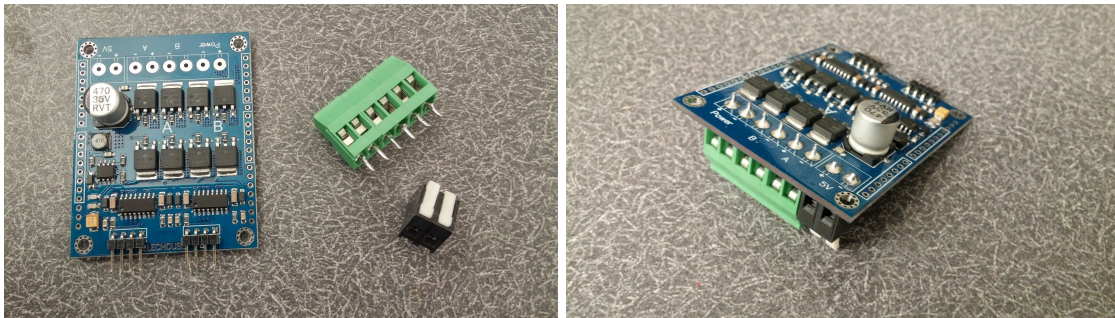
Motor driver board before and after soldering the four terminal blocks.
